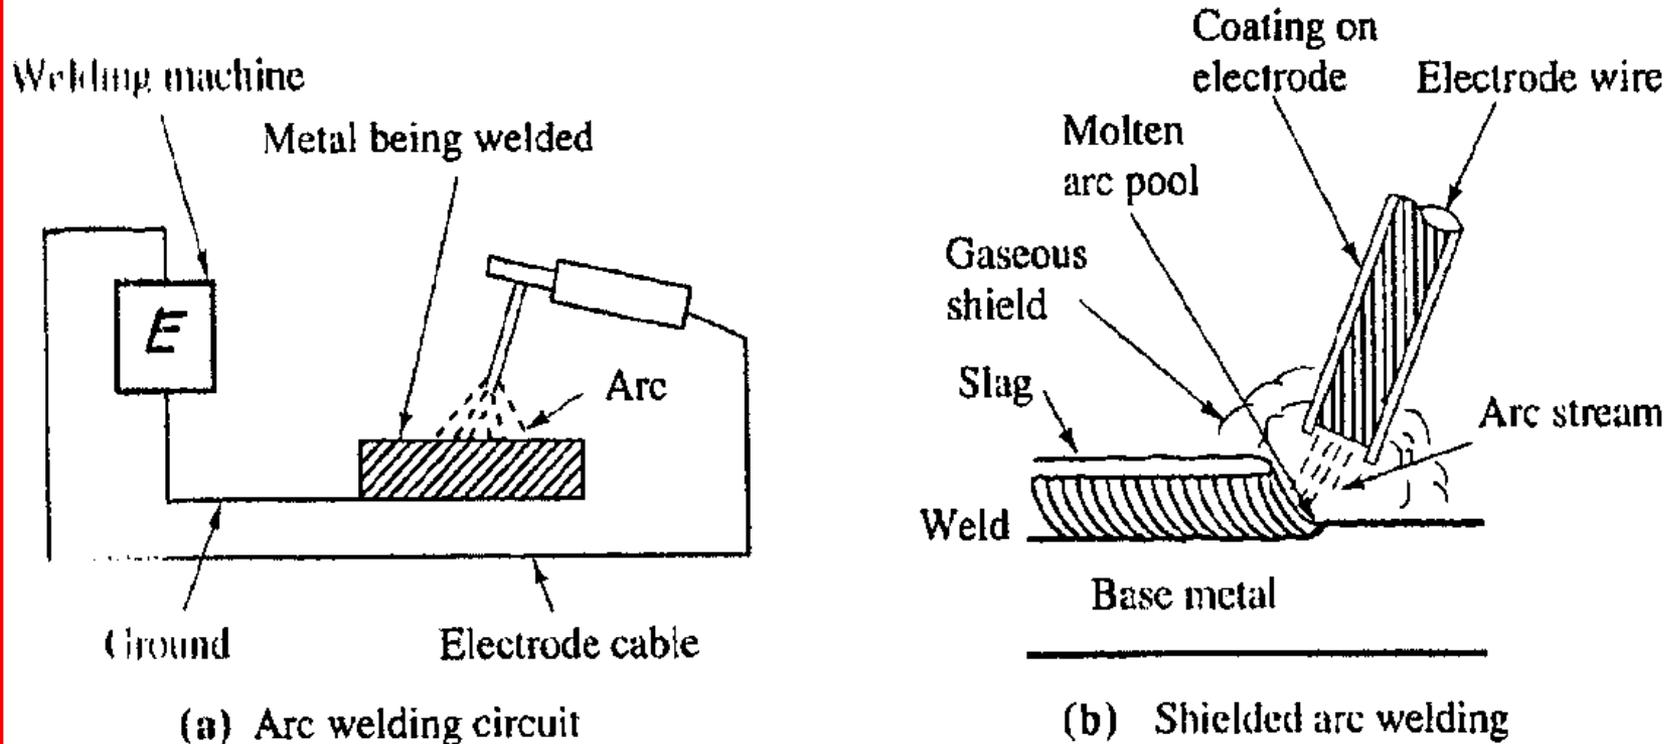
Shielded metal arc welding (SMAW).
